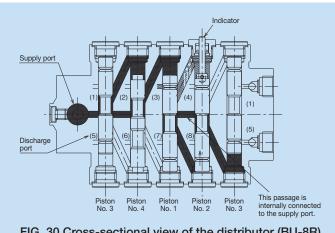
Cross-sectional view of the distributor (BU-8R)
